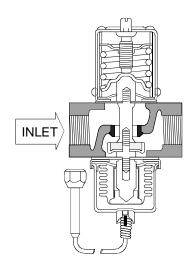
Threaded Type Reverse-Acting Valve Cross Section
